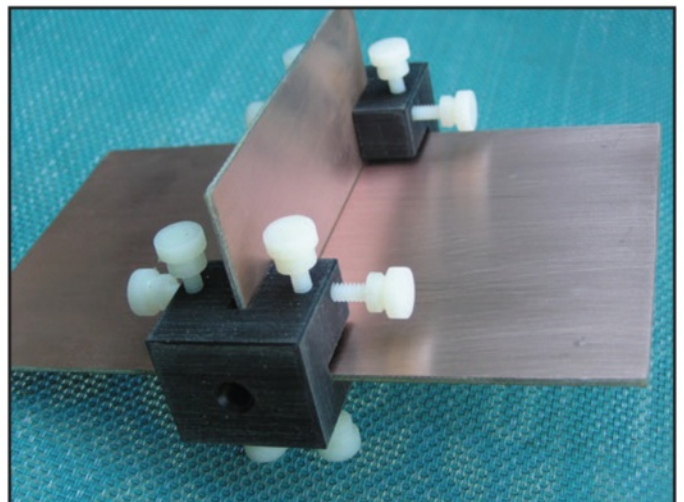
Photo D. Here the SBSSs are holding an interior shield in place for soldering.
